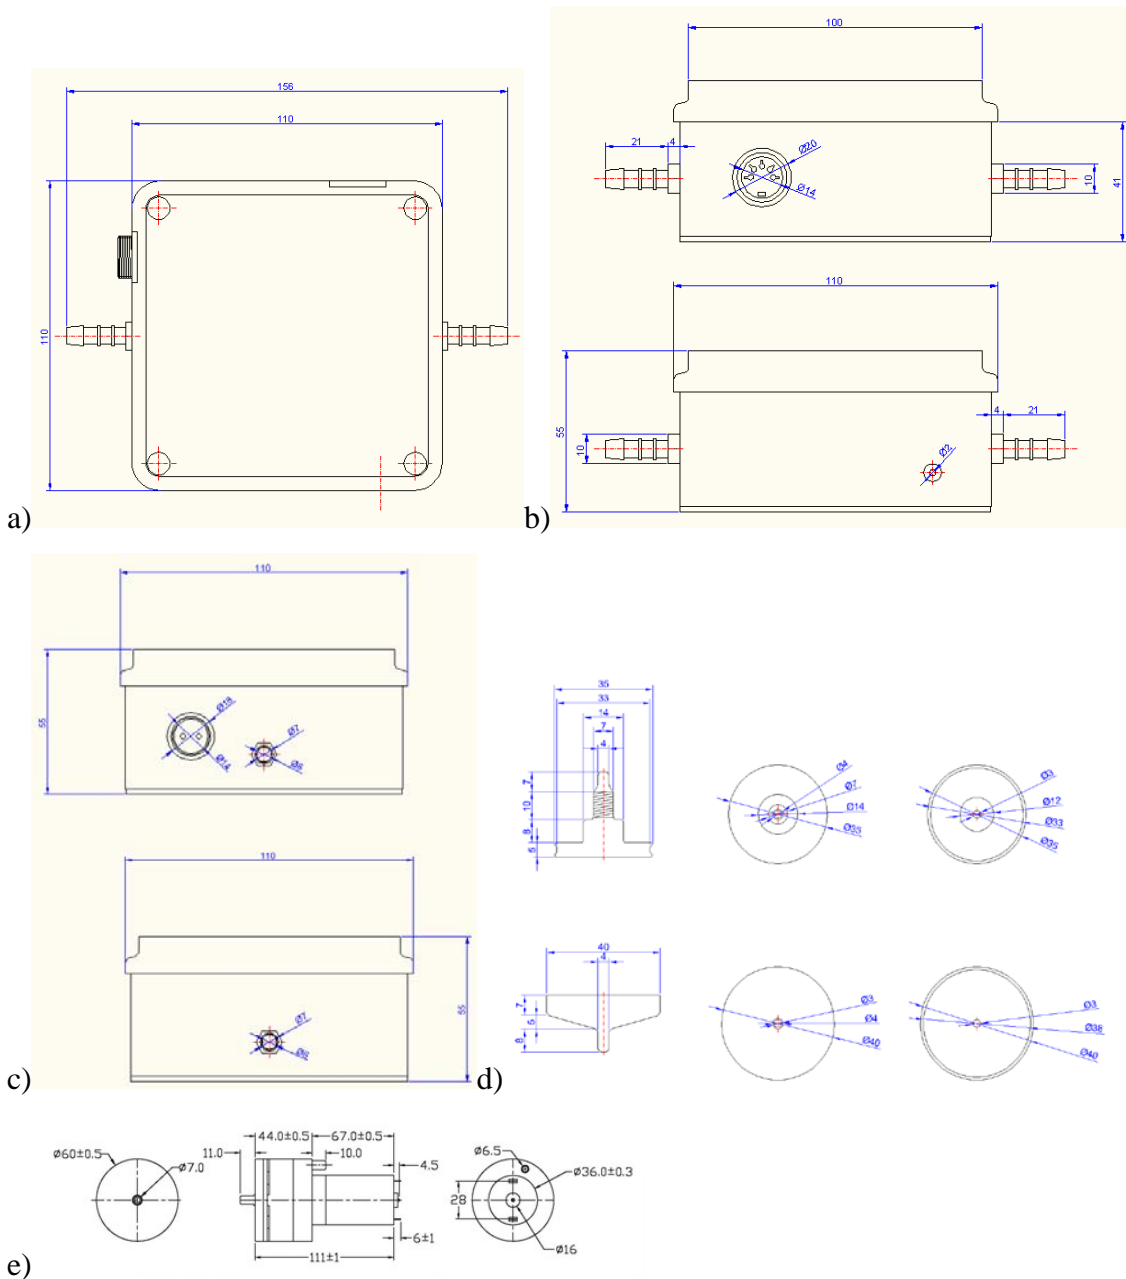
Mechanical drawing: a,b,c) Particle Sensing Unit; d) filter holder; e) mini vacuum pump
